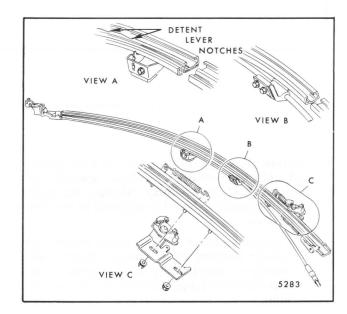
Window Right Guide Cam and Drive Cable Details
